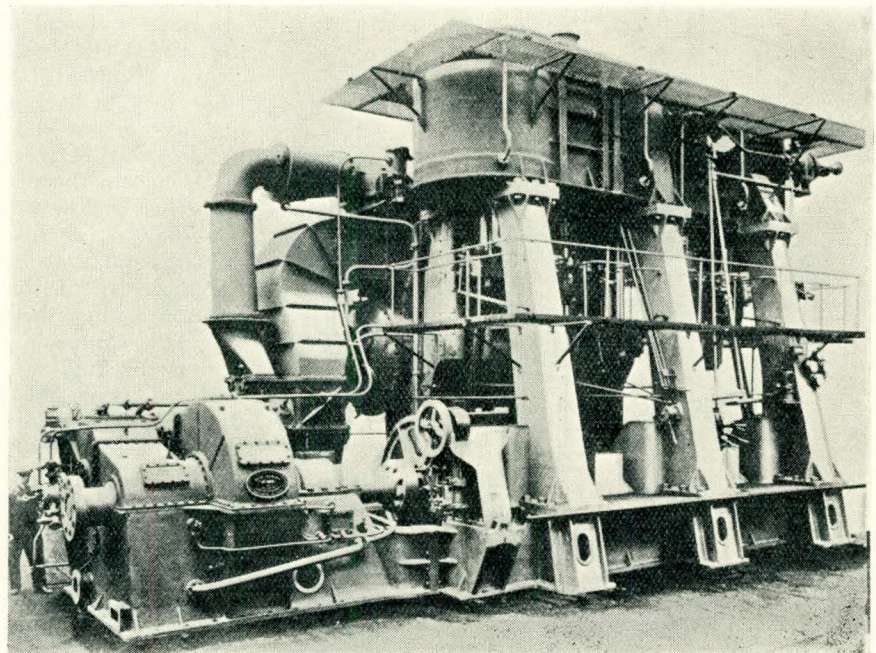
Photograph of engine and Bauer-Wach gear.
